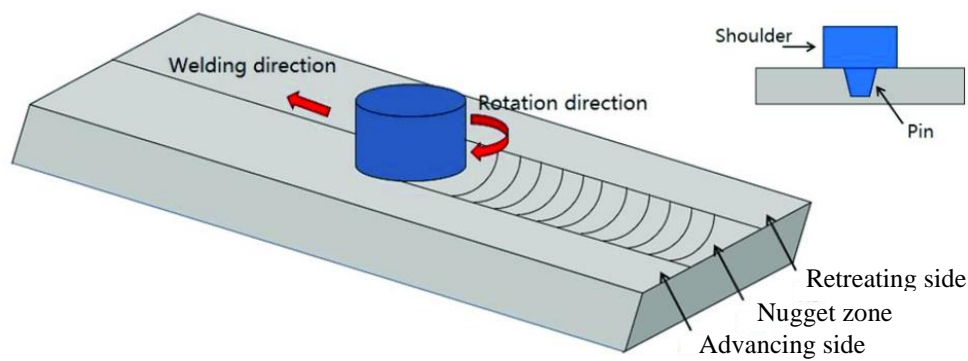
Friction stir welding schematic illustration. Adapted from [35].
